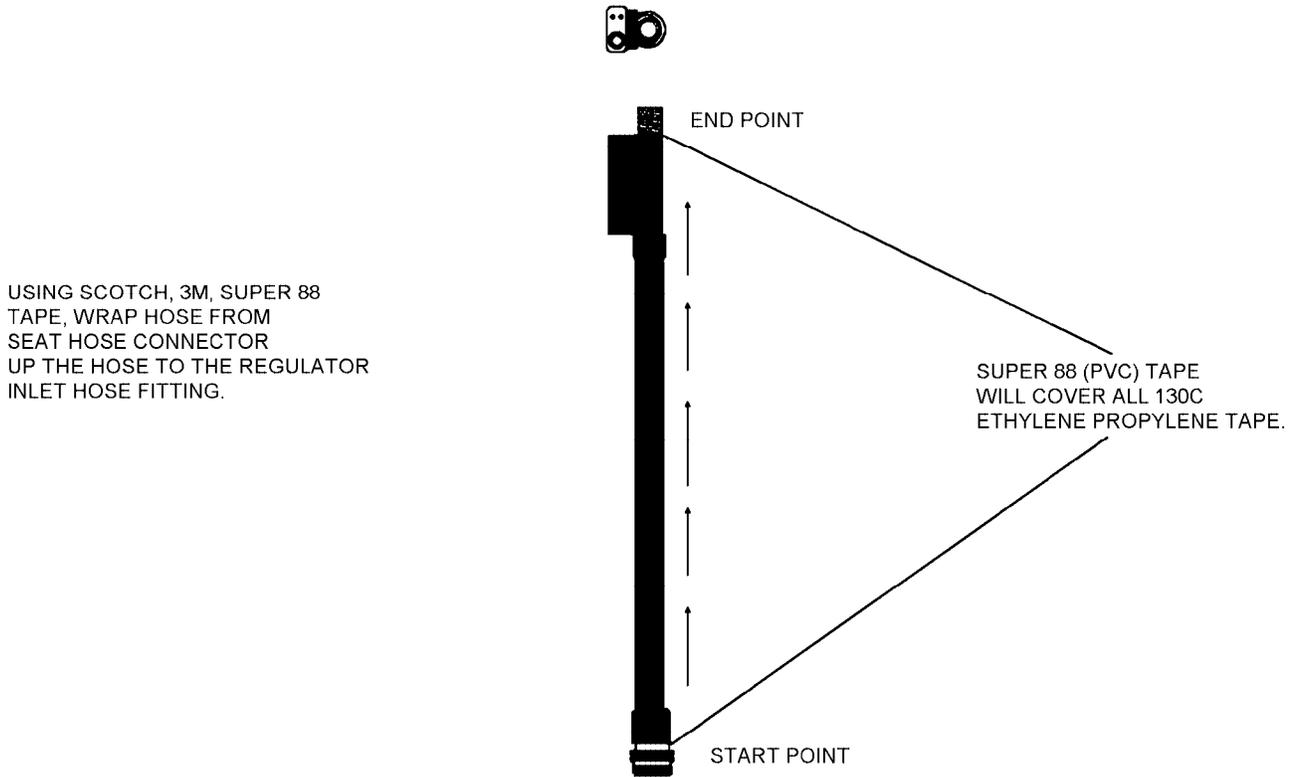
Modified Regulator to Seat Kit Hose Assembly Taping
